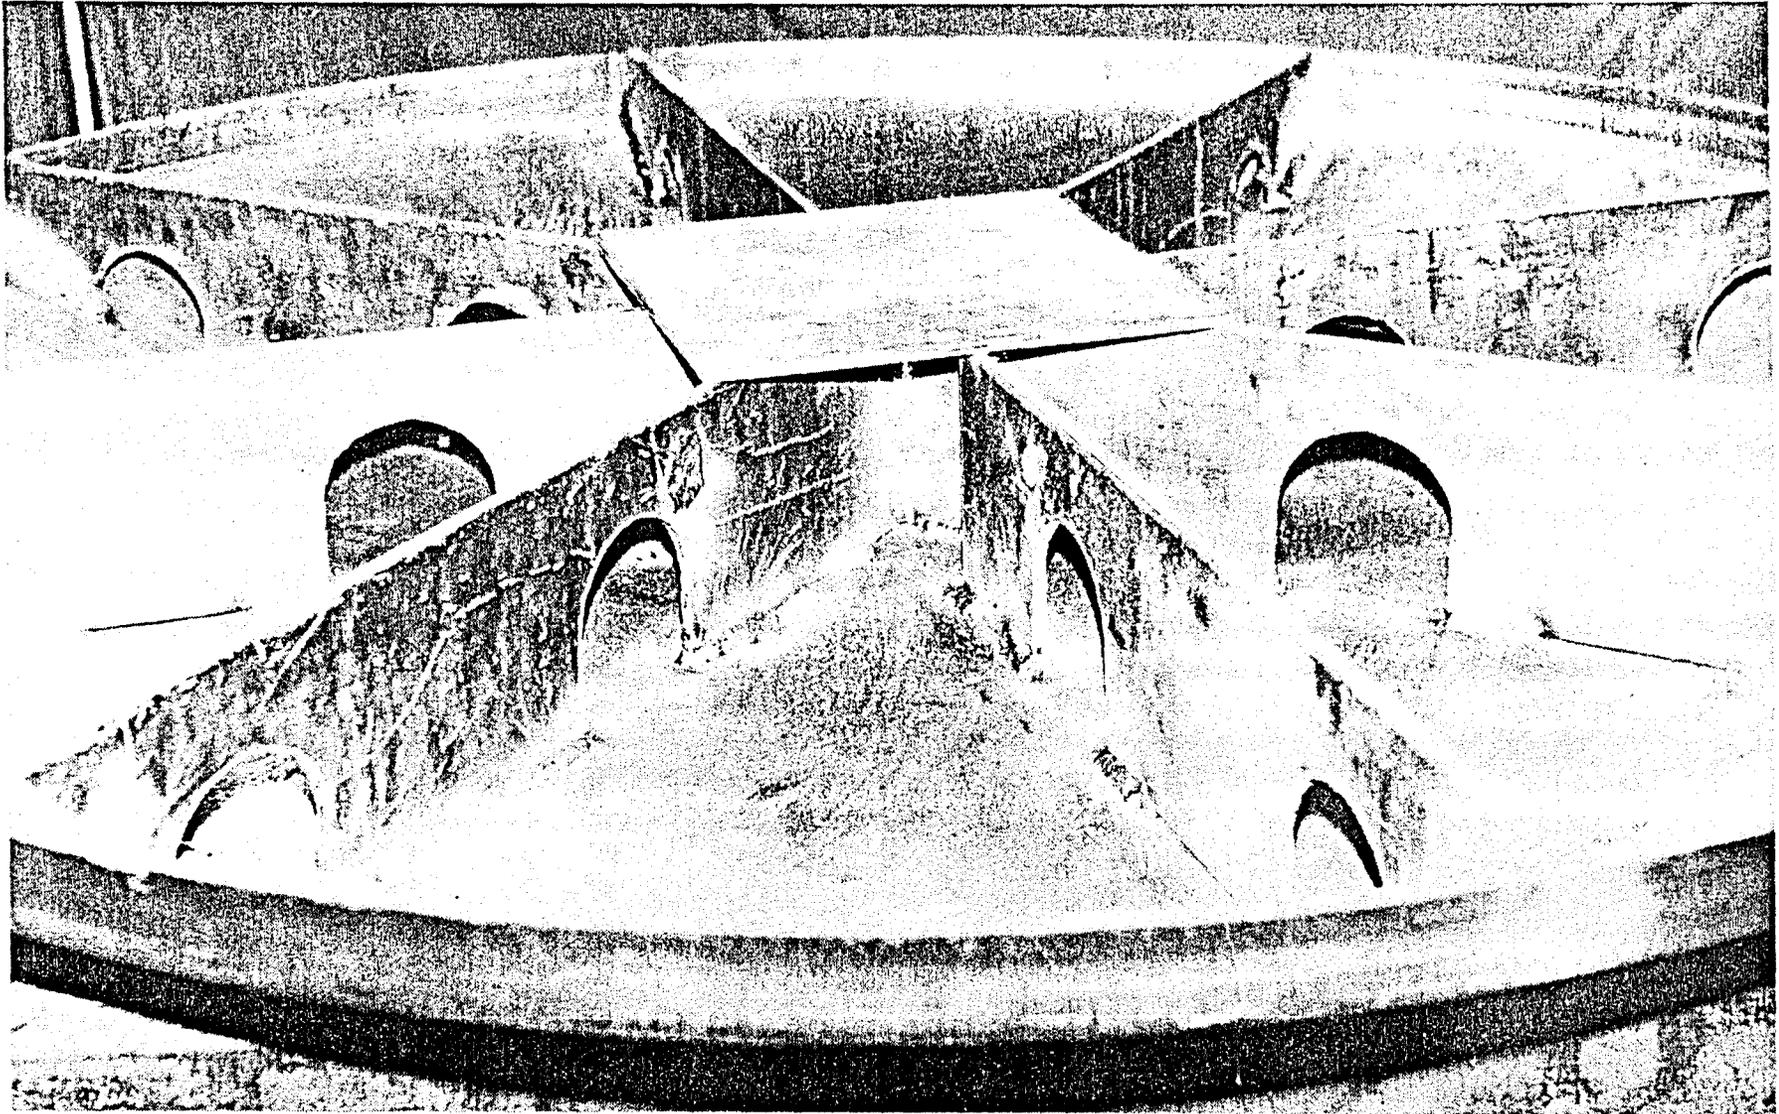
Saucer Skid Manufacture, Flat Bottom Skid Complete with Ribs.
